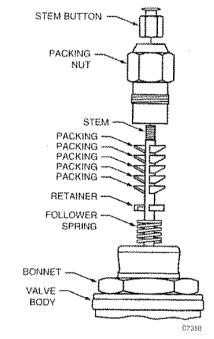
Valve with Cone Packing and 3/8 Inch Stem.
